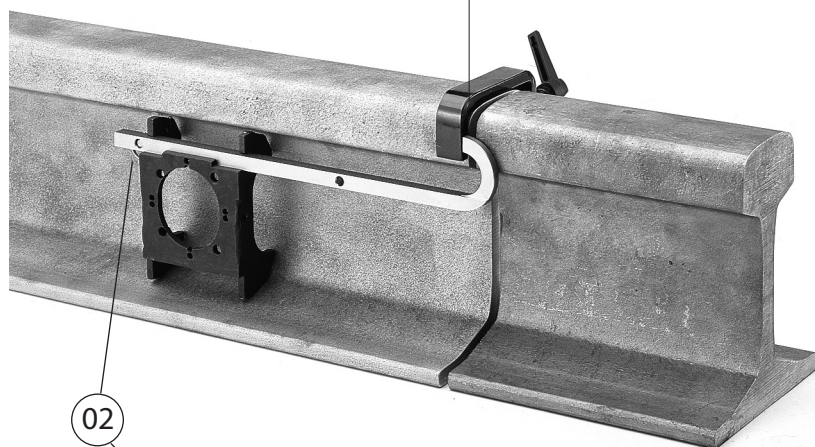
ASSEMBLY OF THE MRF CLAMP
